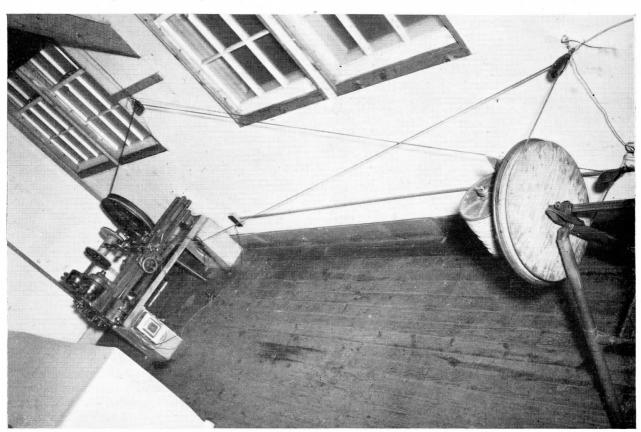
HIGH SPEED COIL WINDING MACHINERY USED BY SIGNAL CORPS BOARD.
